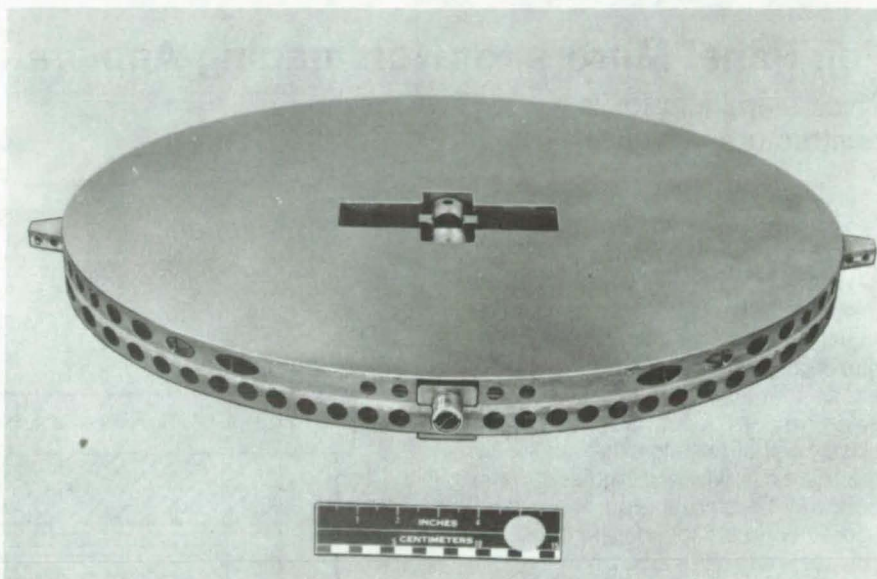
Lightweight Flat Mirrors are fabricated by machining pockets in two plates of beryllium, and then brazing the machined halves together. The mirror shown is less than half the weight of the same mirror made by the previous design.
